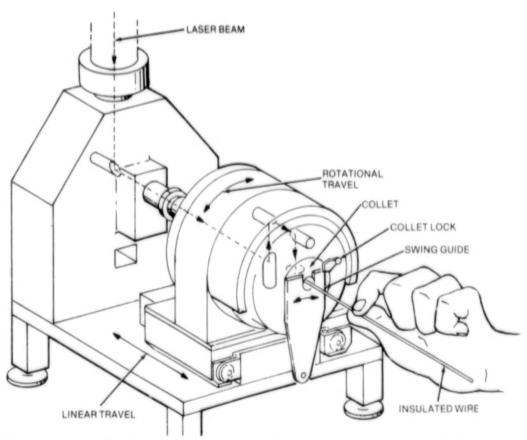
Rotating optical system, consisting of three mirrors and a converging lens, rotates the focused laser beam about the fixed wire to produce a circumferential cut in the insulation. The optical assembly then moves axially to cut the insulation lengthwise. Both motions are controlled by dc motors with adjustable speeds.
